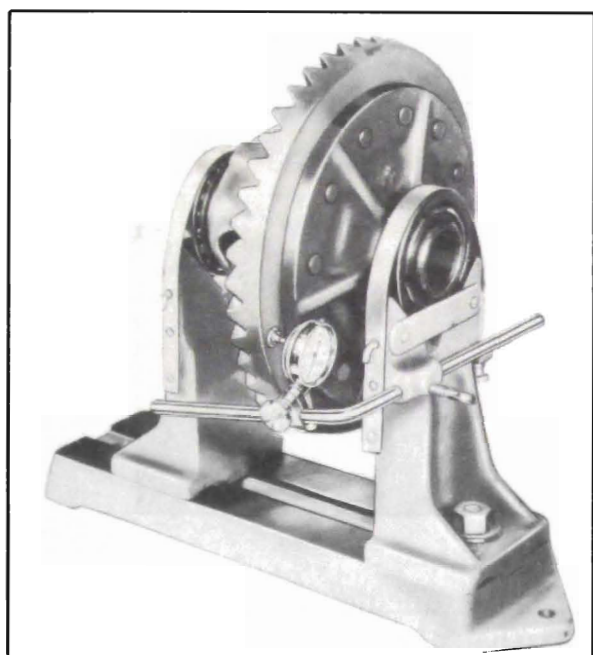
Checking Run-Out of Ring Gear in Fixture U 4-B
